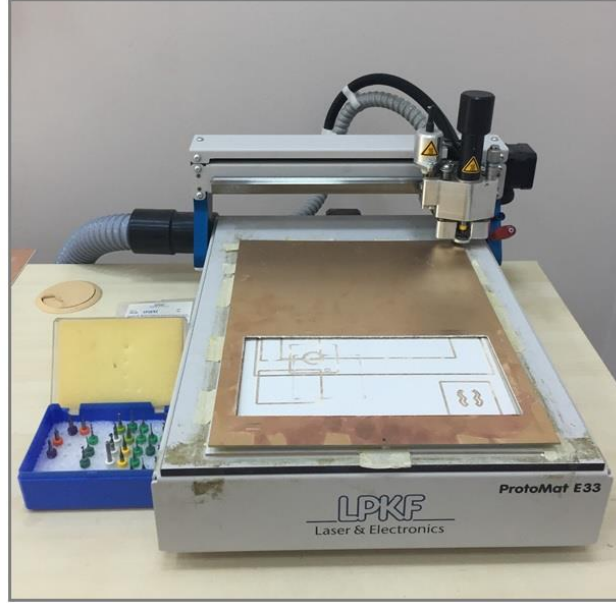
CNC based LPKF Protomat E33 PCB prototyping machine
